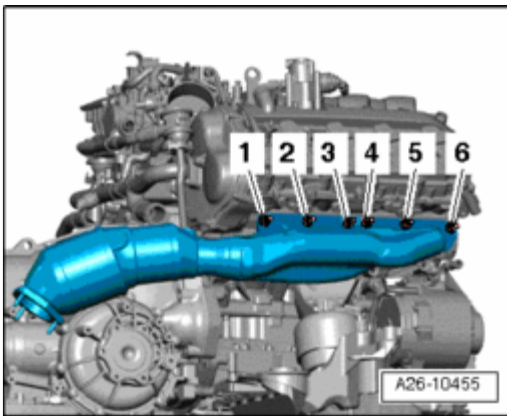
Removing Nuts And Right Exhaust Manifold With Catalytic Converter
